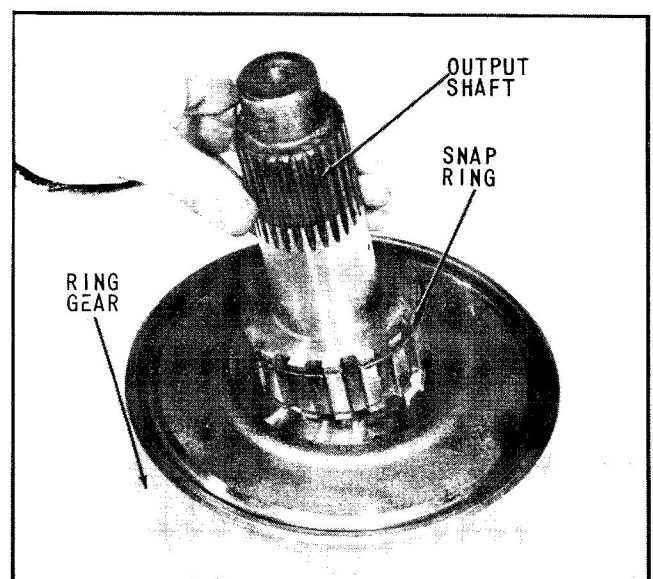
Assemble Output Shaft to Ring Gear (2 to 1 Ratio)
